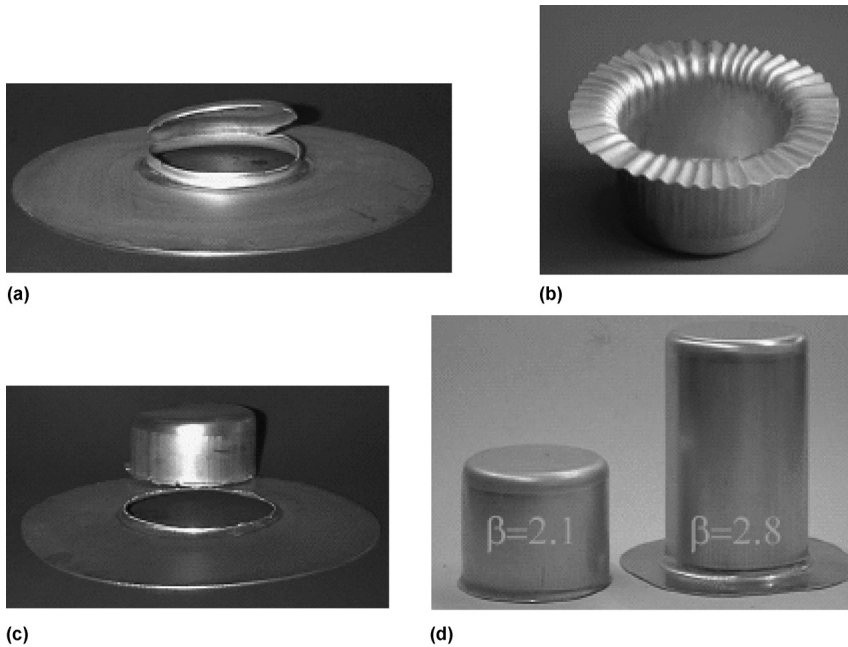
Possible defects and successfully drawn cups in warm deep drawing. (a) Fracture due to insufficient flange temperature and/or excessive blank holder force. (b) Wrinkling due to low blank holder force. (c) Fracture due to insufficient punch cooling. (d) Cold deep drawing: limiting draw ratio (LDR) = 2.1. Warm deep drawing with partial cooling: LDR = 2.8. Source: Ref 5.30
